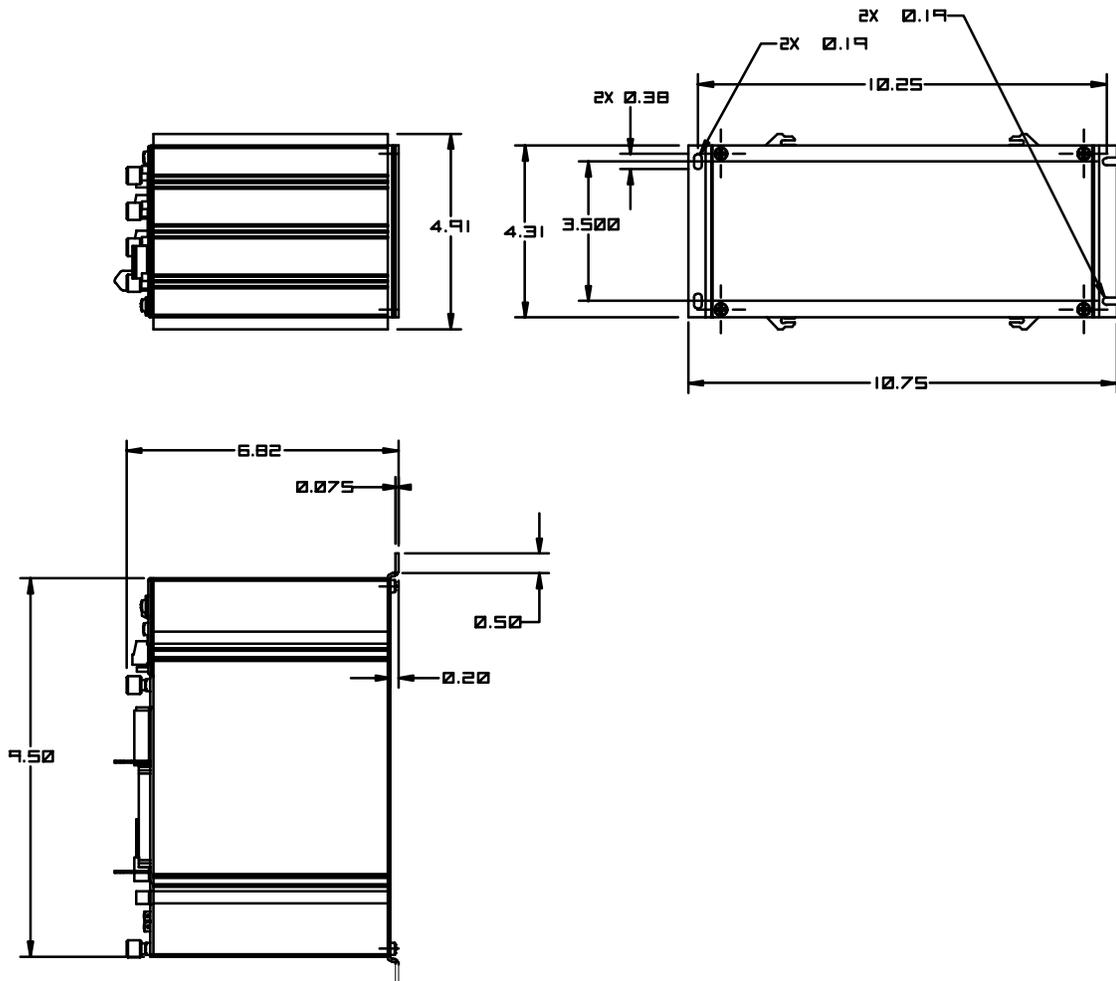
c: JAGXTREME Blind Chassis Model Dimensions
